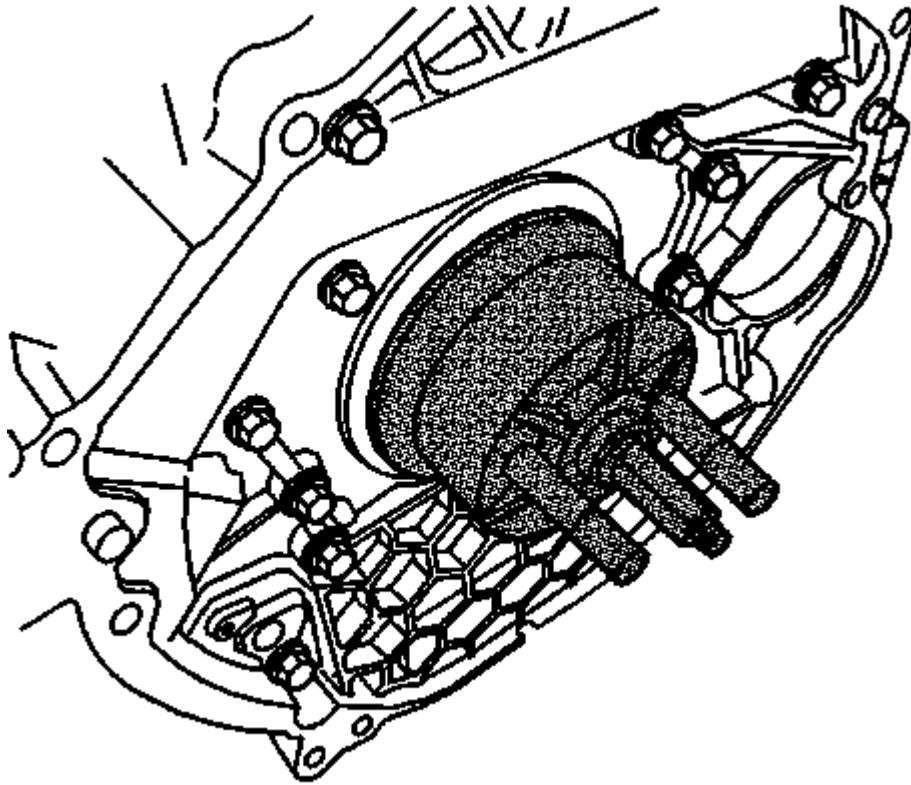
Pressing Crankshaft Rear Oil Seal In Using J 44642
